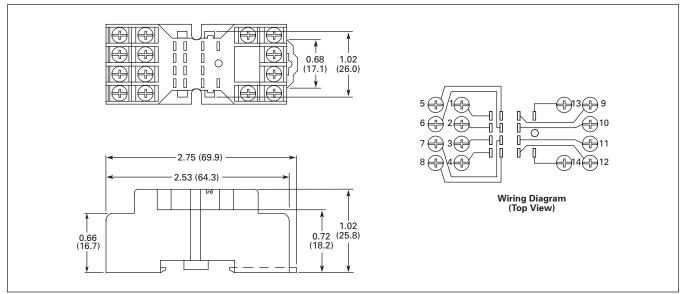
D2PA6 — Approximate Dimensions in Inches (mm)
